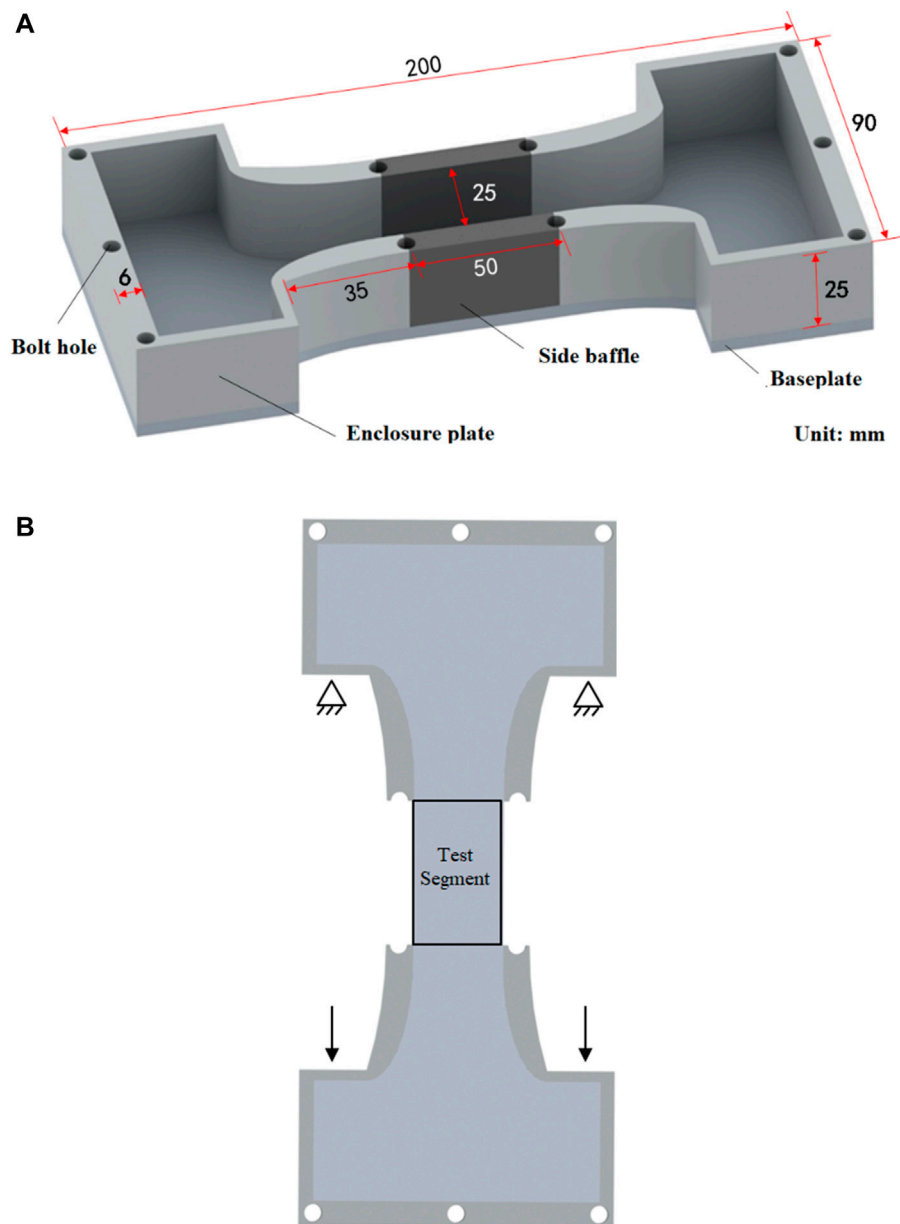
| Design and dimensions of the curing mold: (A) dimensions of different parts of the mold and (B) the usage of the mold.
